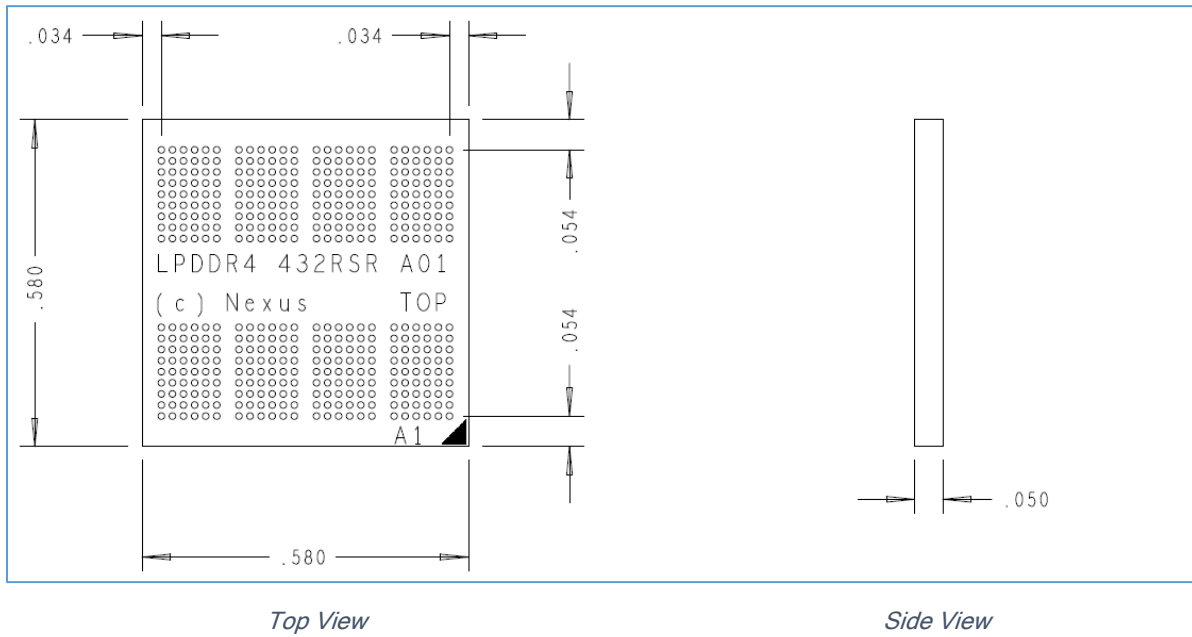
LPDDR4 432 Ball Riser Mechanical Dimensions
